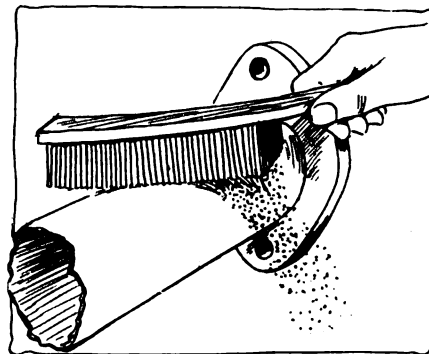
While the joint is still hot after brazing, the excess of spelter and borax may be cleared off with a steel wire brush
